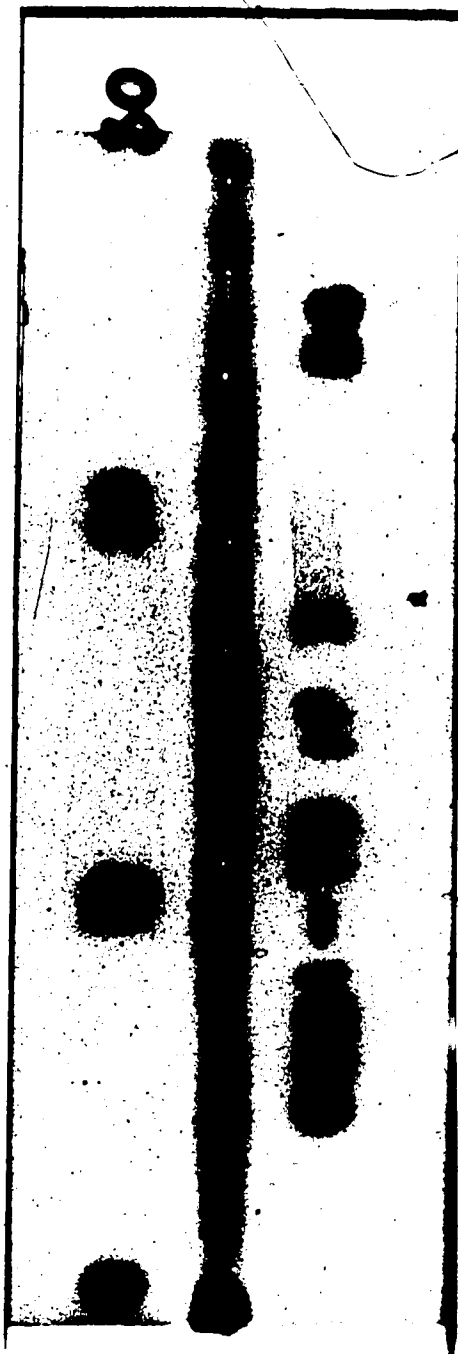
Radiograph of specimen 3 - IP flaw (reduced size).
